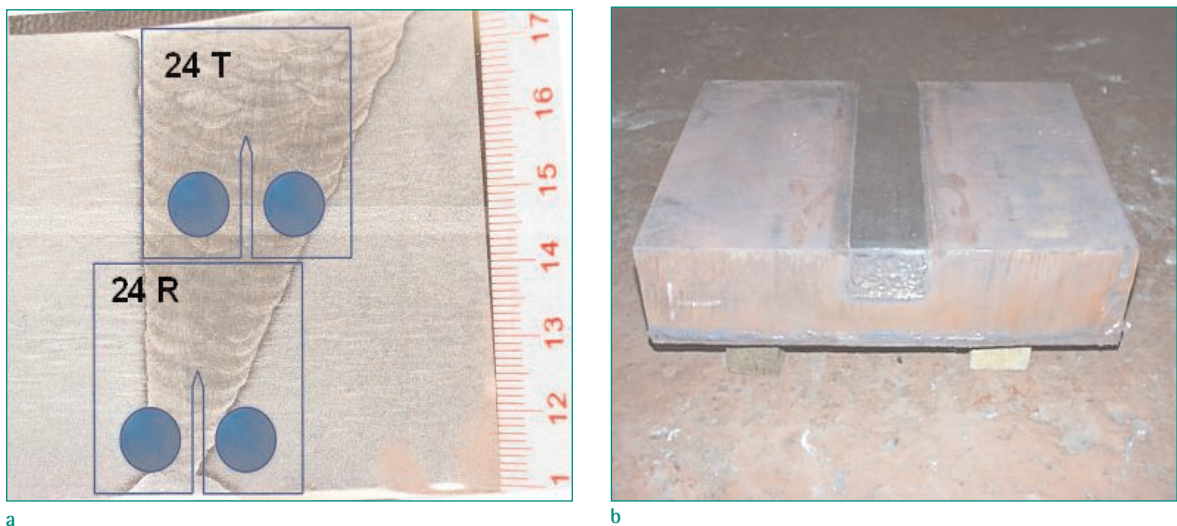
a: Macro-etching of Alloy 182 weld between two Alloy 600 plates with location of 0.5 T (T) specimens. b: Simulated Alloy 182-SA 508 Cl. 2 dissimilar metal weld.
